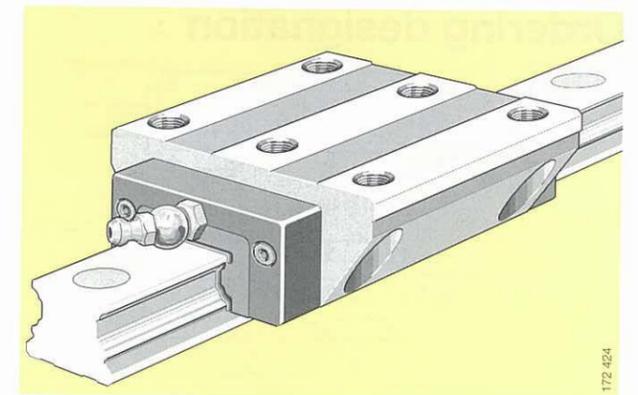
· Four-row linear recirculating ball bearing and guideway assembly KUVE
